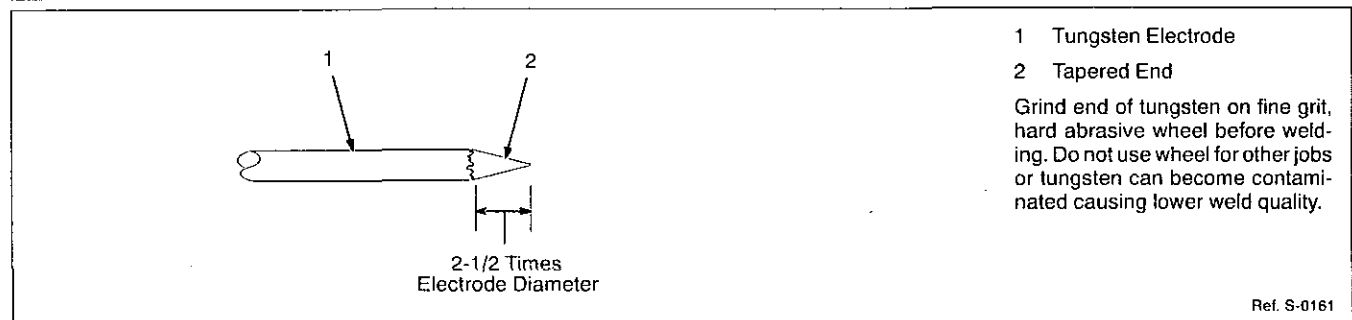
Preparing Tungsten For DC Electrode Negative (DCEN) Welding
